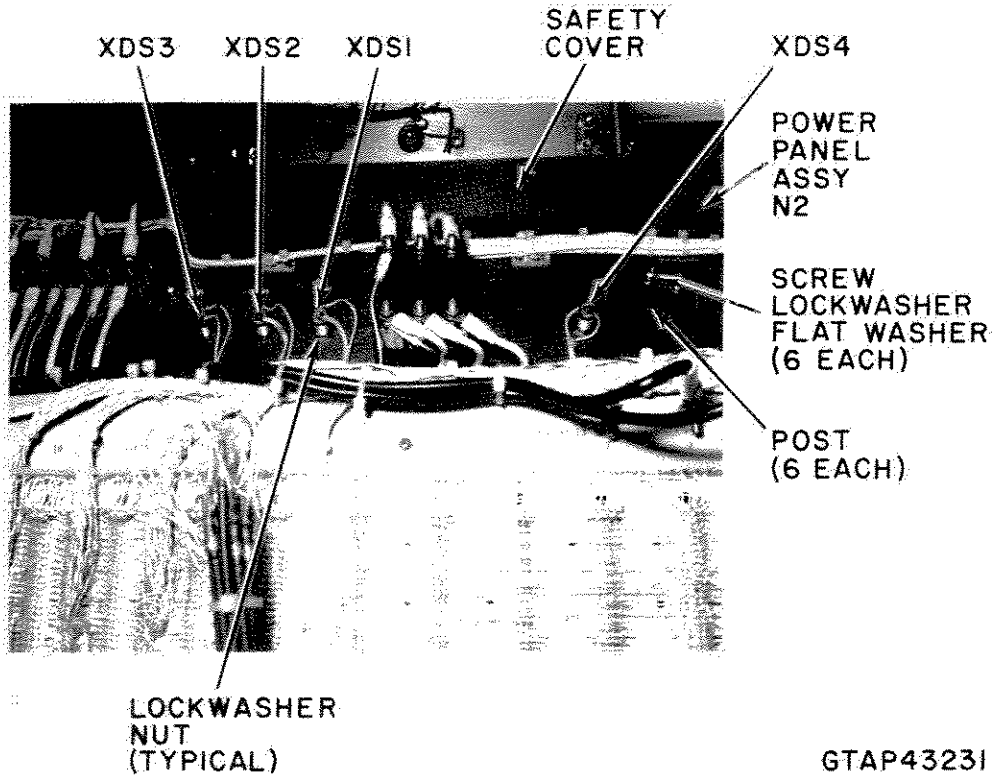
Transmit Beamformer Cabinet, Unit 150, Lampholder N2XDS1 through N2XDS4 (Rear View)
